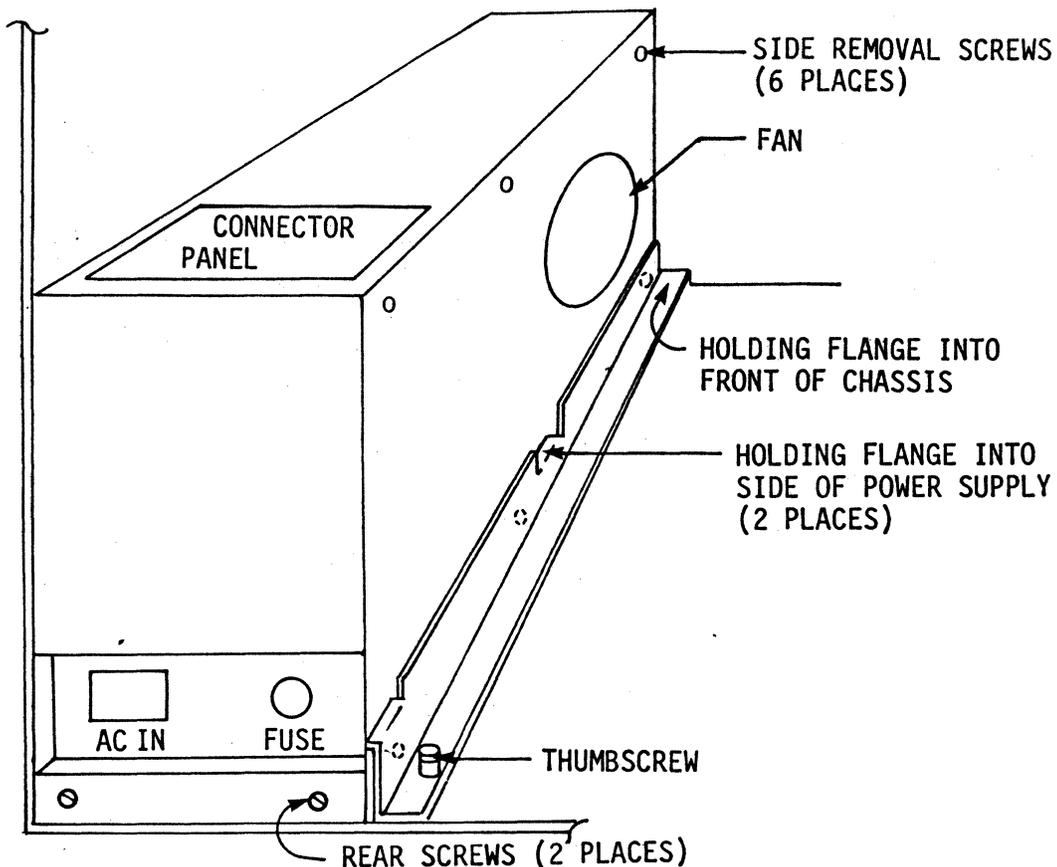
POWER SUPPLY DISASSEMBLY
